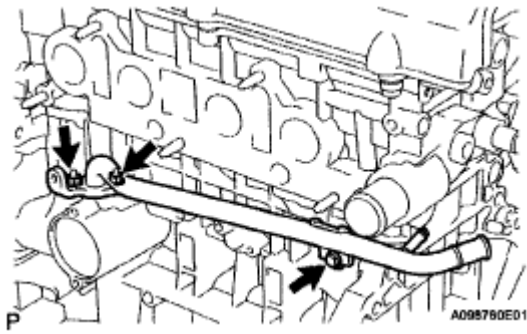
Locating Water By-Pass Pipe, Nuts And Bolts
